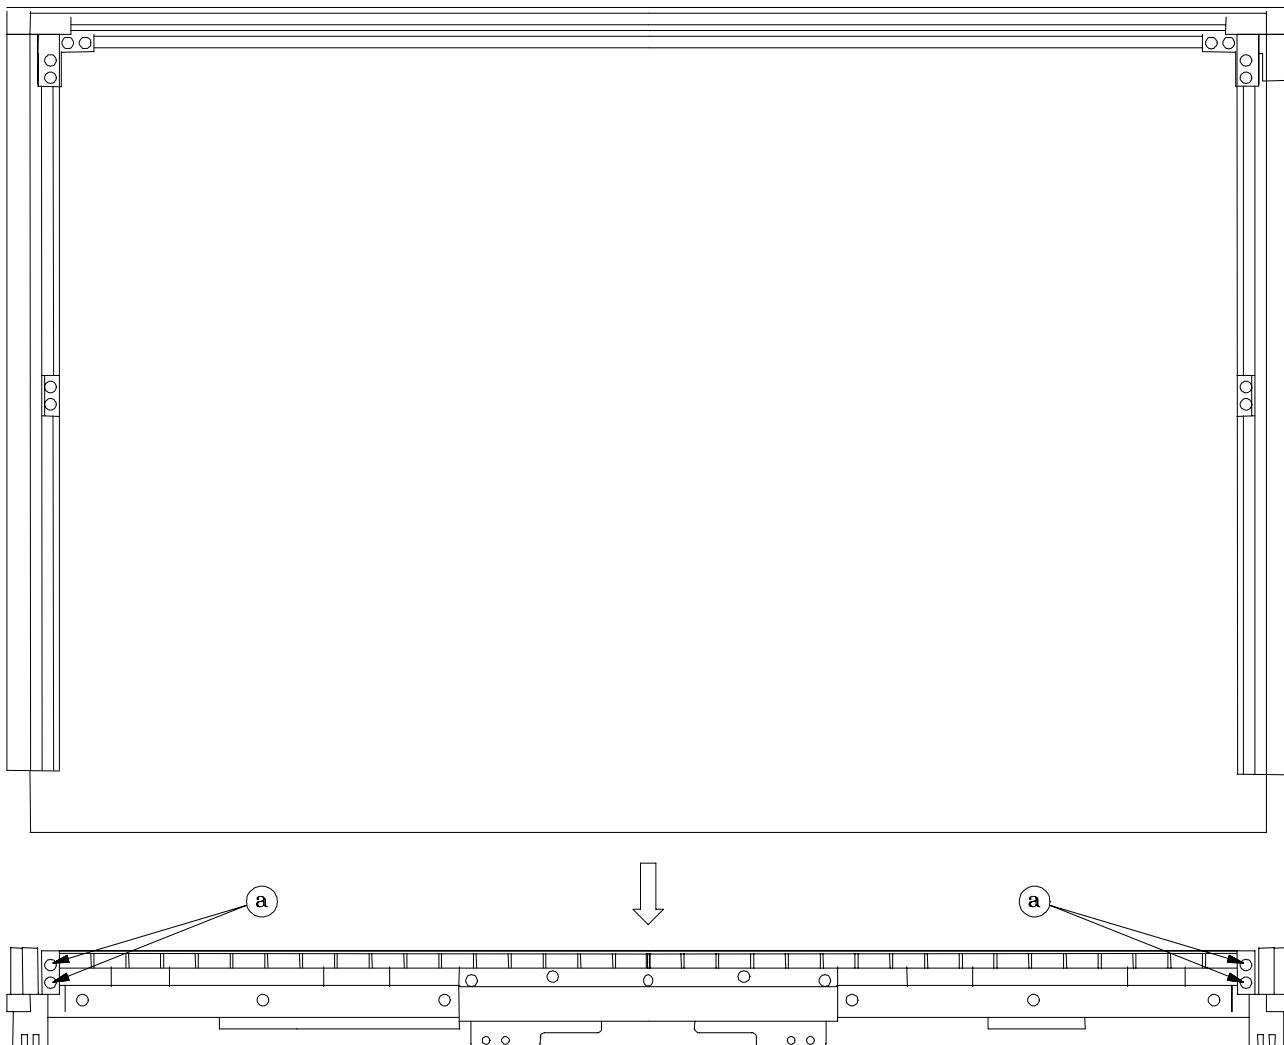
SCREEN-FRAME-BOTTOM Removal (Rear View)
